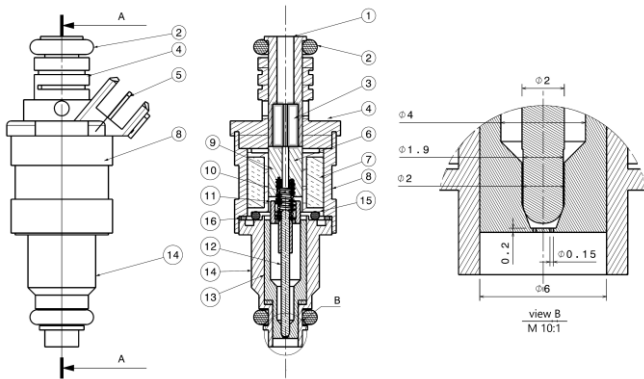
General layout of a electromagnetic gasoline injector: 1-Inlet port; 2-O-ring; 3-Filter; 4-Cover; 5-Terminal; 6-Coil holder; 7-Coil; 8-Upper Housing; 9-Armature; 10-Spring; 11-Guide; 12-Needle; 13-Camera; 14-Lower Housing; 15-Internal O-ring; 16-Spacer Washer
